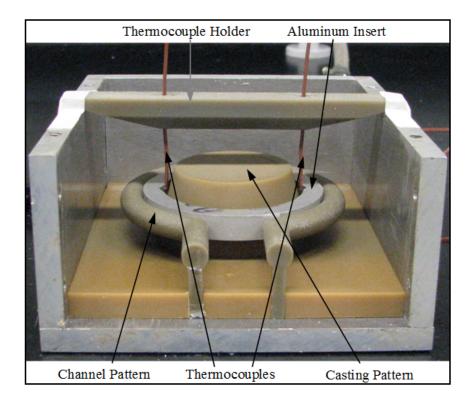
Thermocouple Placement CCCC Mould with Insert
